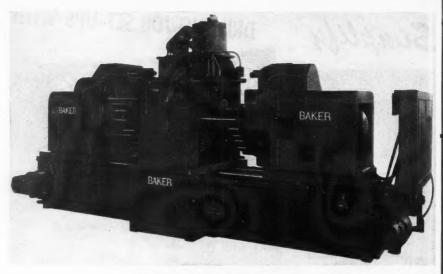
Baker Special 31/2 x 24 Hydraulic Feed Machine
